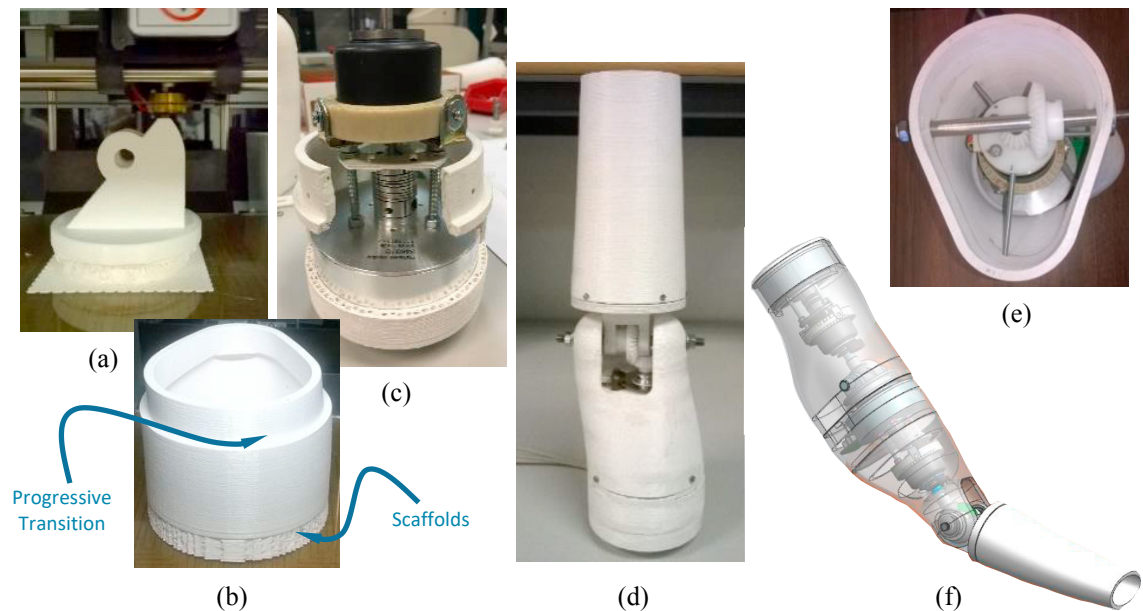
(a) printing the arm-forearm joint; (b) printing first part of the arm; (c) motor-gear reducer assembly using a flexible coupling; (d) arm-forearm assembled; (e) view of the 3 points to adjust crown-pinion union; (f) interior view of the arm and shoulder.
